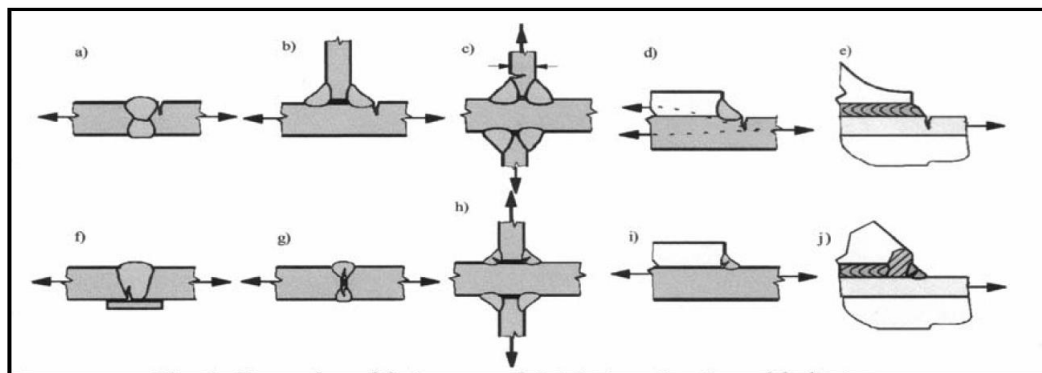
Examples of fatigue crack initiation points in welded plate joints, after Niemi et al. (2006).
